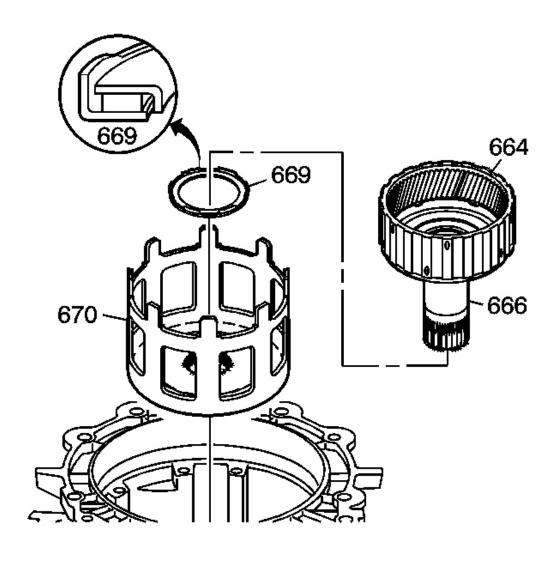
View Of Input Internal Gear, Reaction Shaft & Sun Shell Courtesy of GENERAL MOTORS CORP.
